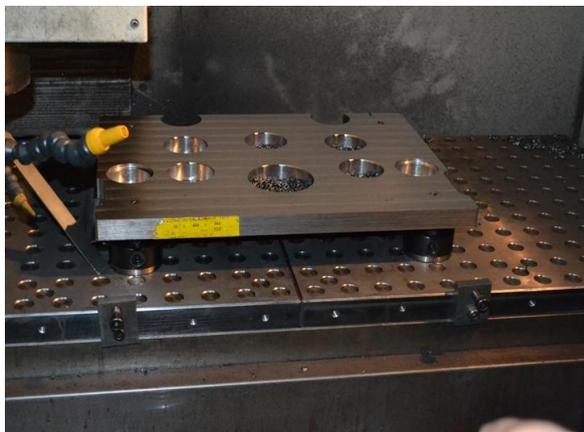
Injection mold part machined on FAMUP MC120 EVOLUTION
